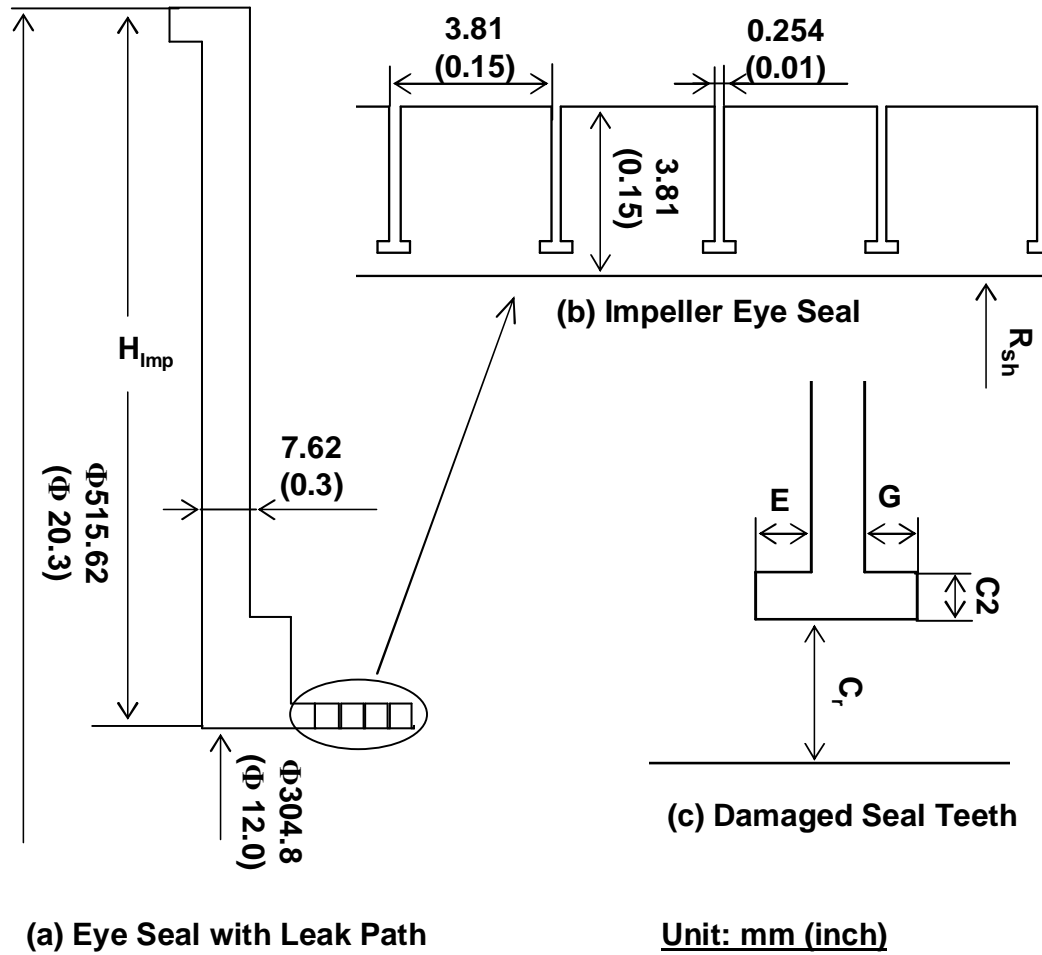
Dimensions of impeller eye seal with leak path channel and damaged teeth tips: (a) leak path channel; (b) impeller eye seal; (c) damaged seal teeth.
